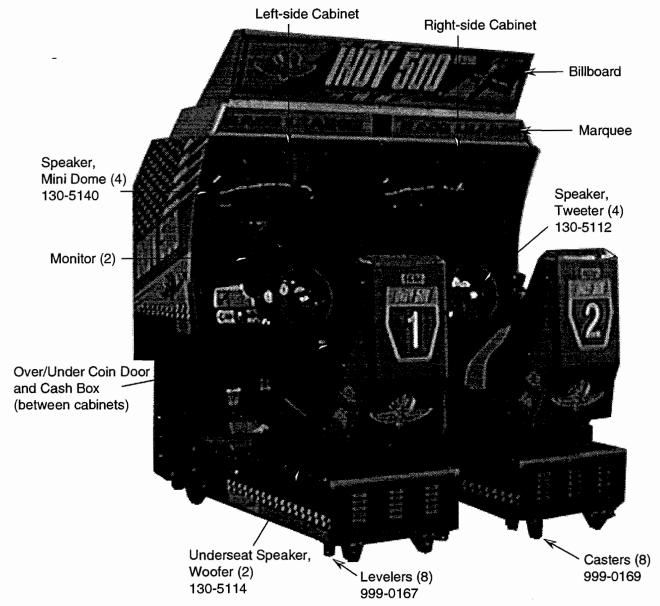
INDY 500 TWIN CABINET ASSEMBLY
